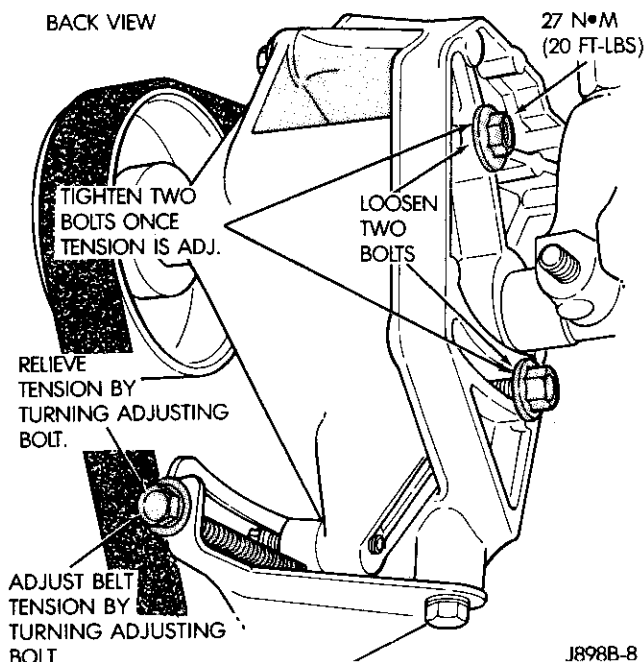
Serpentine Belt Removal/Installation - 2.5L (Back View)
